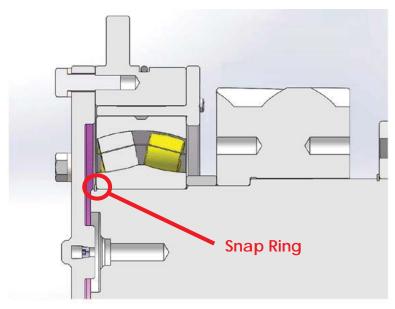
GB Output Shaft Schematic with Seal Detail. Snap Ring indicated.
